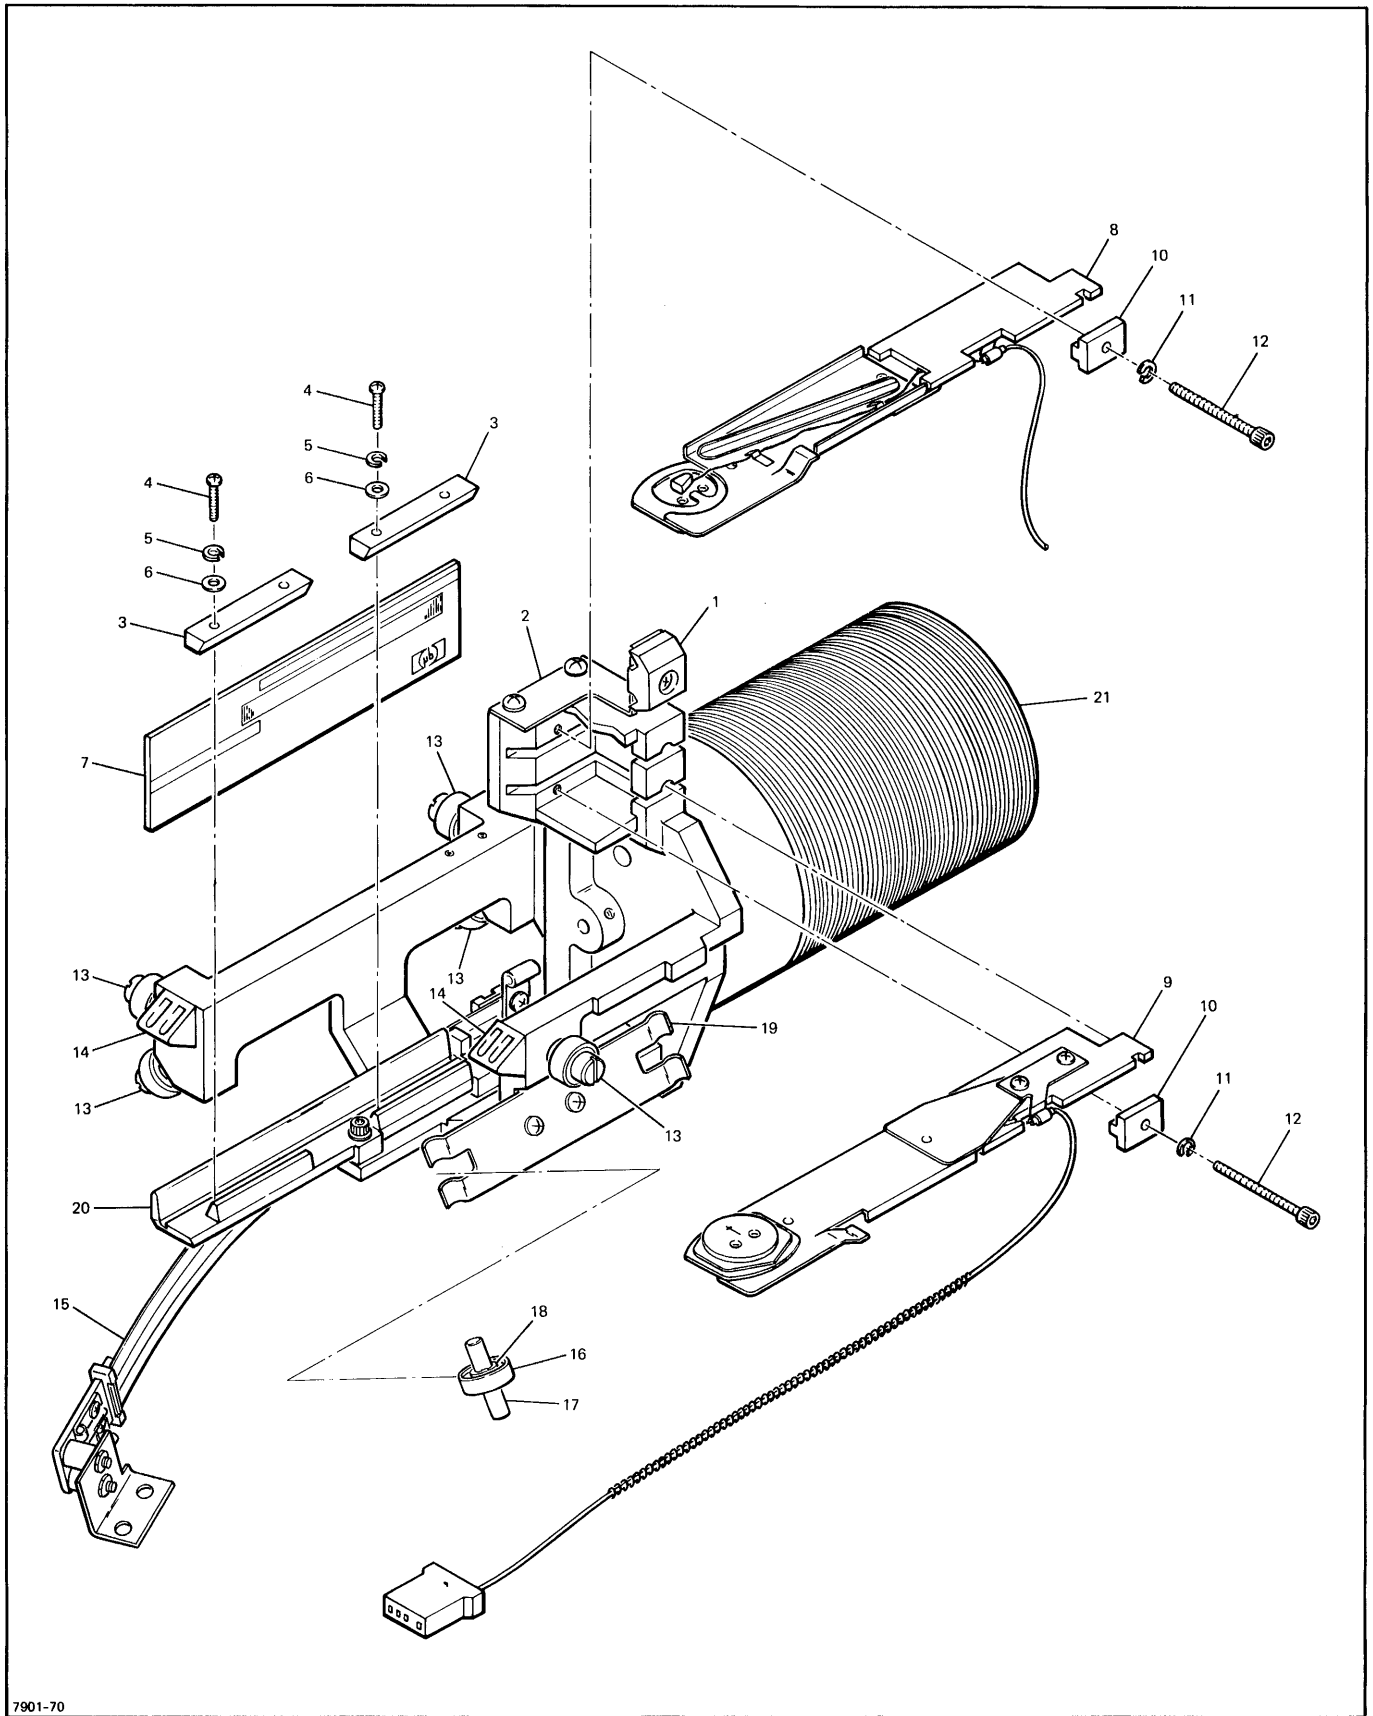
Rear Panel Assembly, Parts Location Diagram
